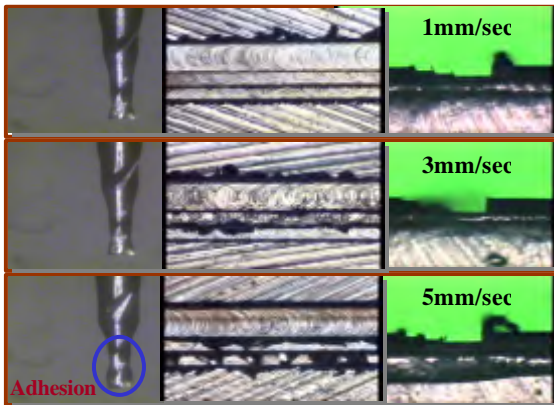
(b) Machining surface and burr shapes in accordance with machining conditions to 100,000rpm
